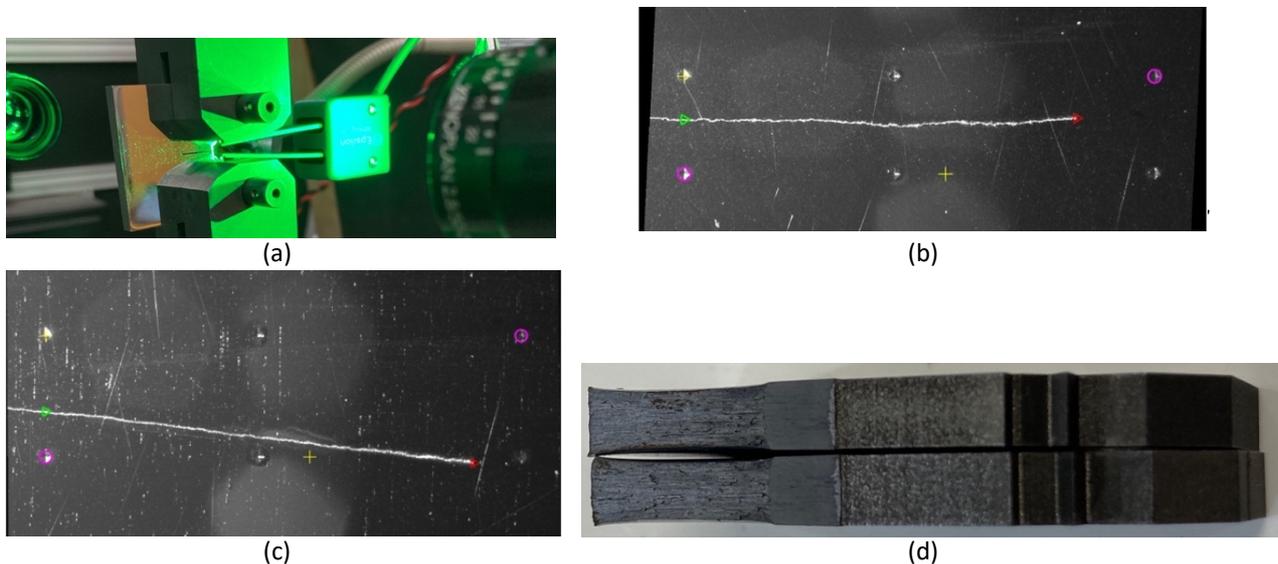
(a) Test setup on the tensile machine showing the C(T) specimen pinned on the clevises with the clip gauge and the two cameras used to monitor the crack during the pre-cracking phase. (b) Near straight and centered propagation of the fatigue crack in a girth weld centreline specimen from S8. (c) Deviation of crack path out of the symmetry plane in the heat-affected zone of a girth weld specimen from S8. (d) Illustration of the fracture surface after testing showing from left to right (i) the EDM notch, (ii) fatigue fracture from the fatigue pre-crack phase and (iii) ductile fracture from the toughness test.
